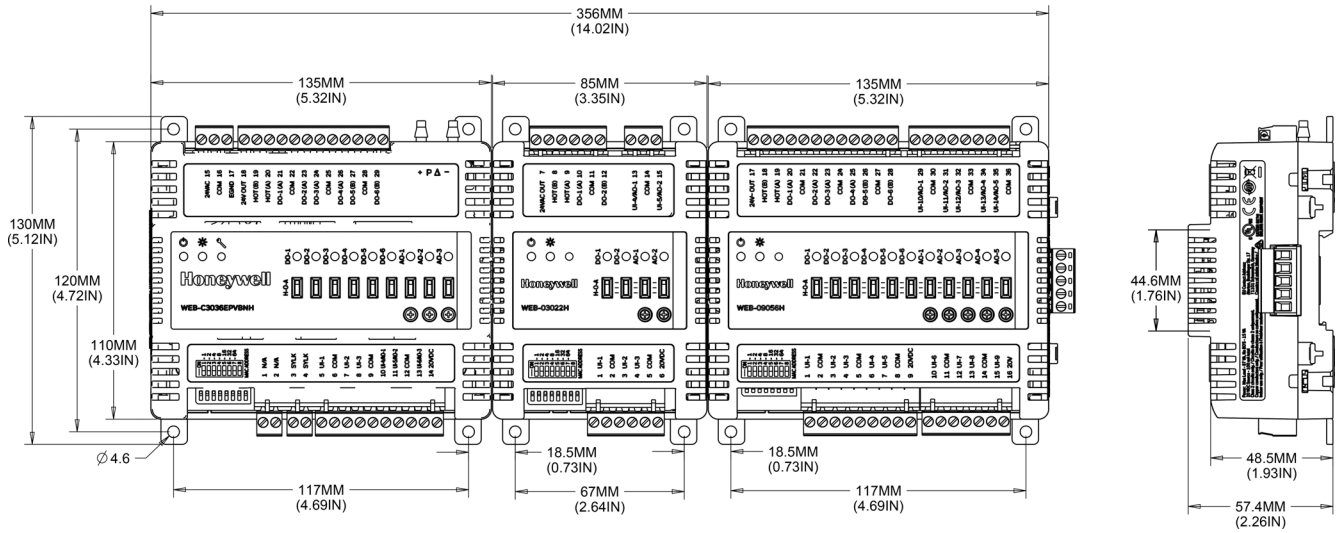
Dimensional view of Stacked Controller and Expansion IO modules
